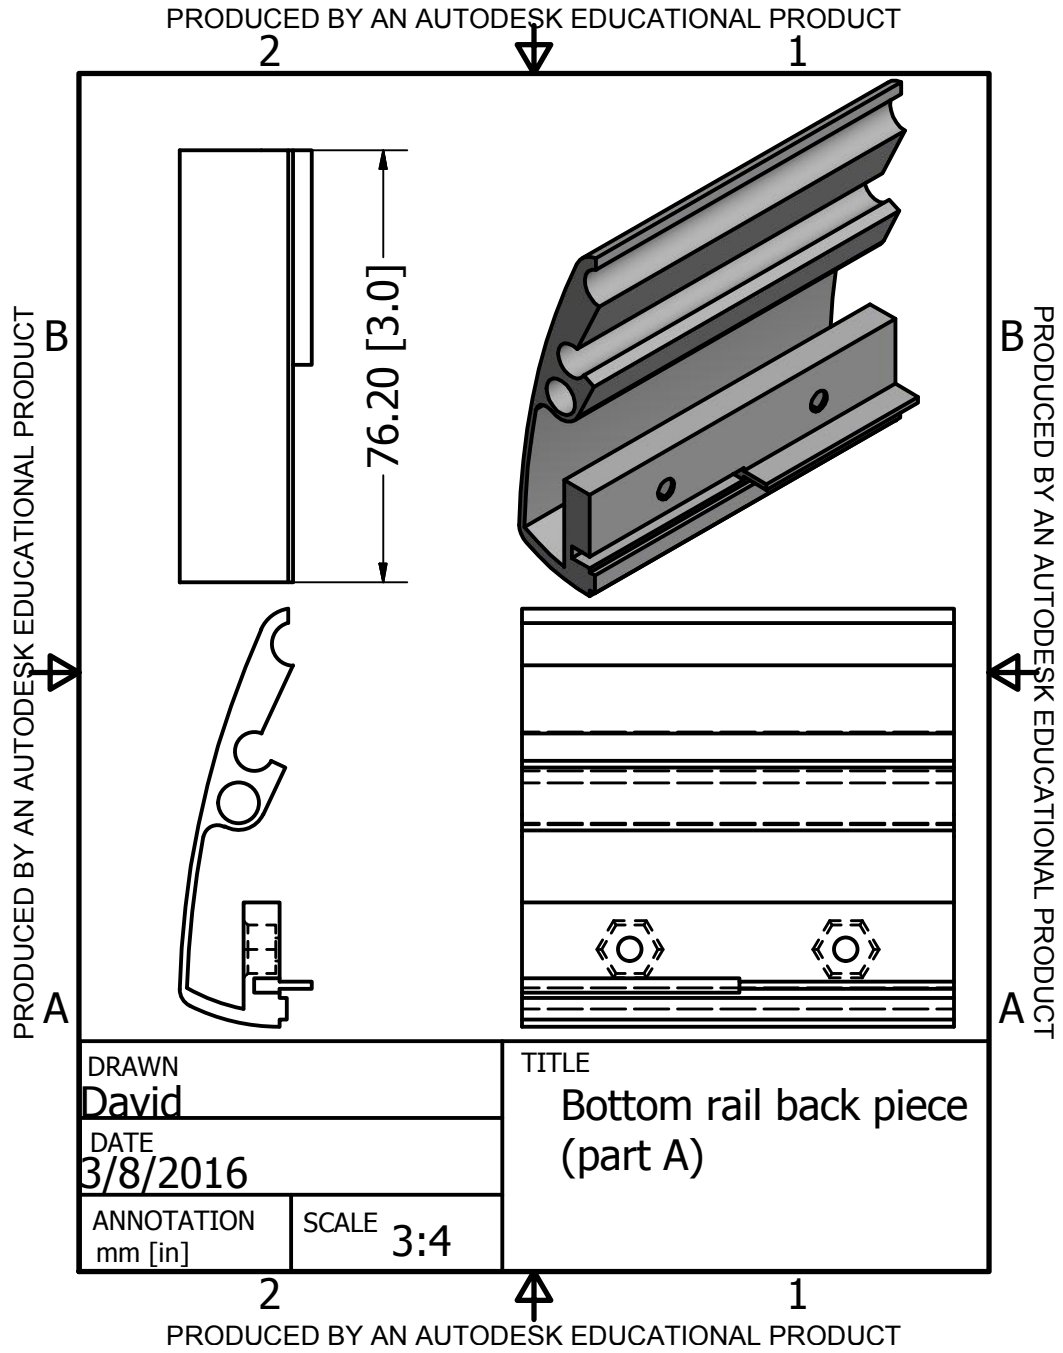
Mechanical drawing for the back piece of the bottom rail.
